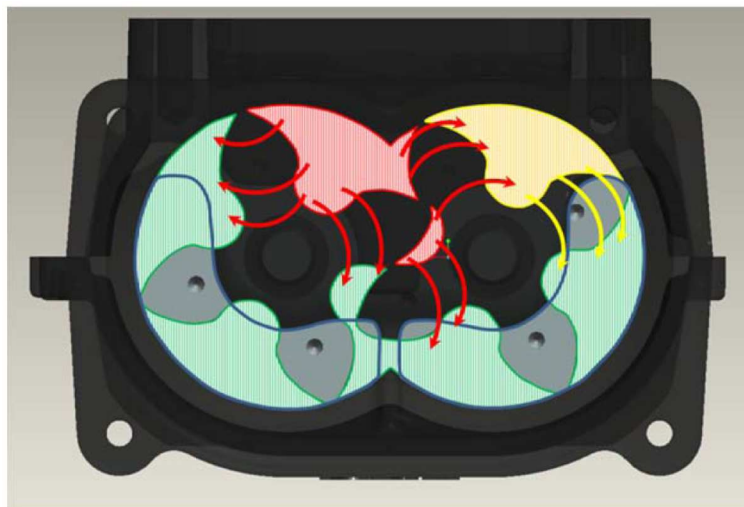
Leakages caused by clearances between rotor ends and end plates (housing and bearing plate) [23]
